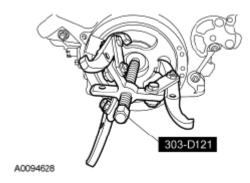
Removing Crankshaft Pulley Courtesy of FORD MOTOR CO.
